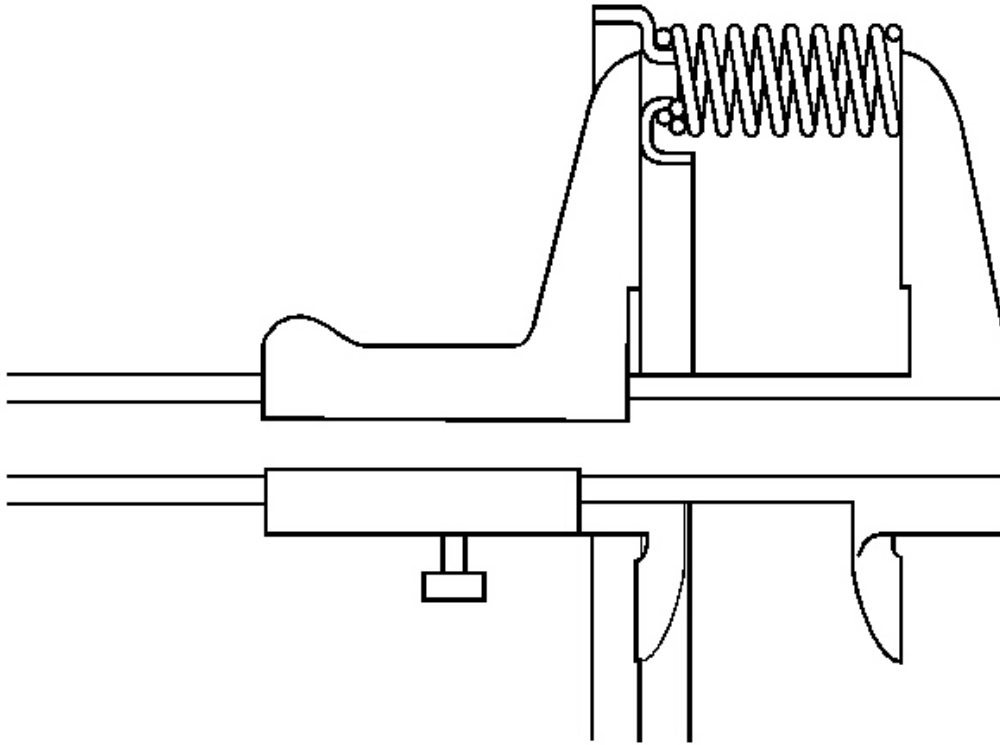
Measuring Free Length Of Spring Using Vernier Calipers
